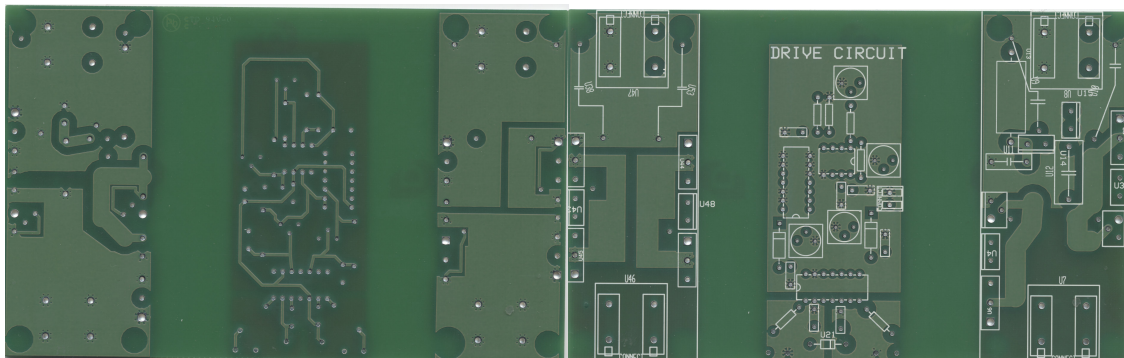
The PCB card as received from the manufacturer. Bottom layer (left) and top layer (right)
